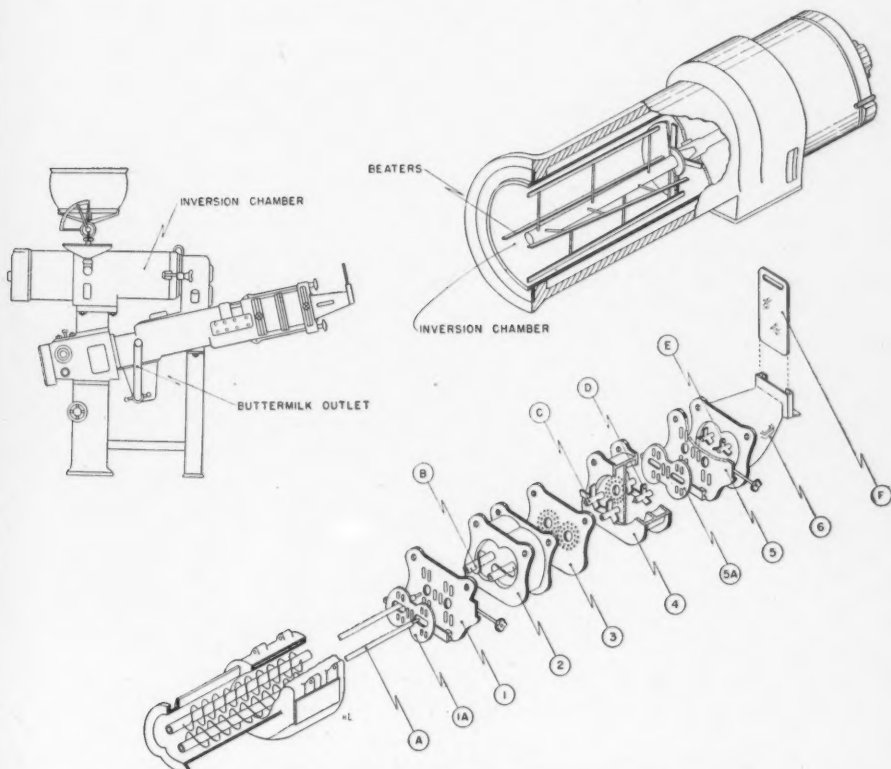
Structural details of the Fritz continuous butter-making machine.
